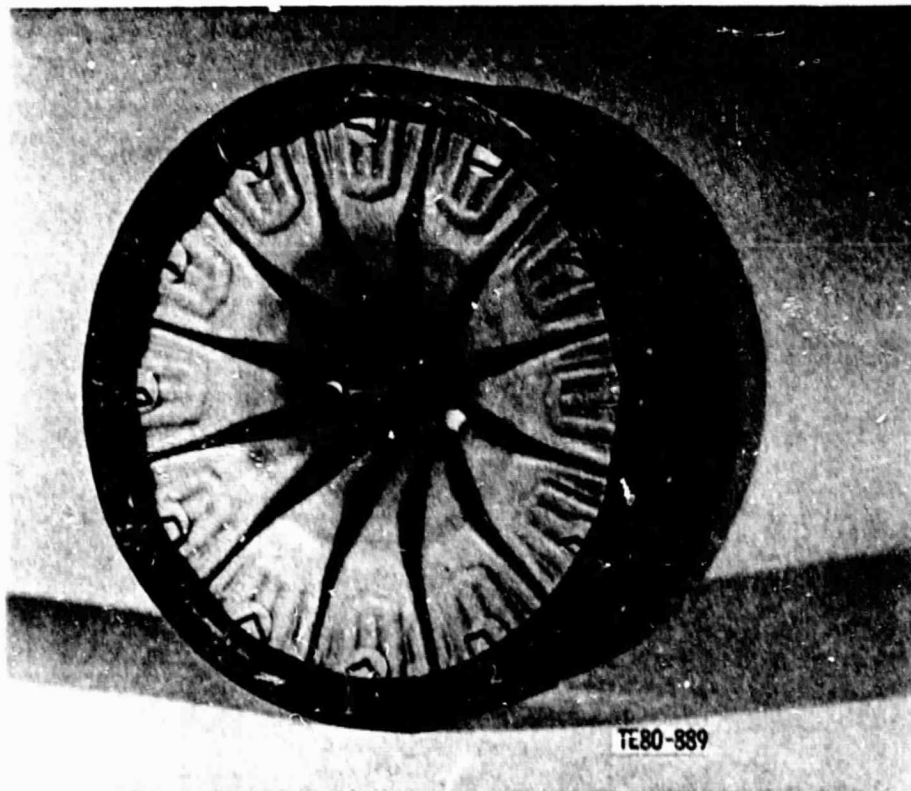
Assembled Gasifier Turbine Wheel Mold.
